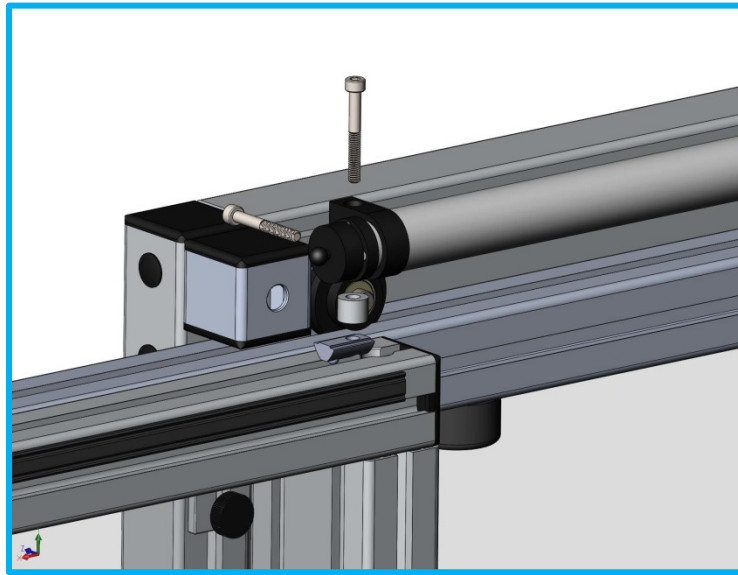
Auto Closing Assembly Frame Mount Exploded
